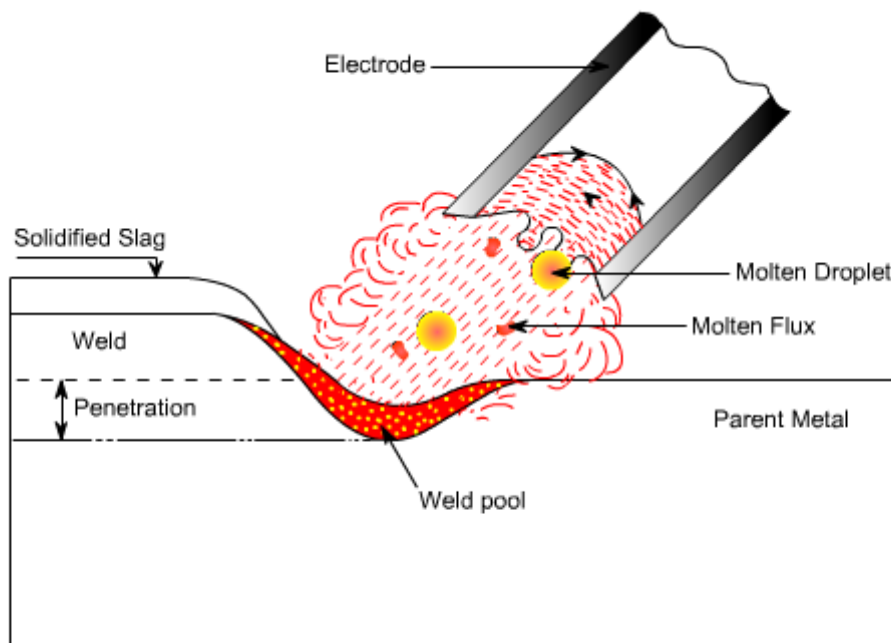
Molten Metal and Flux Transfer to Weld Pool
